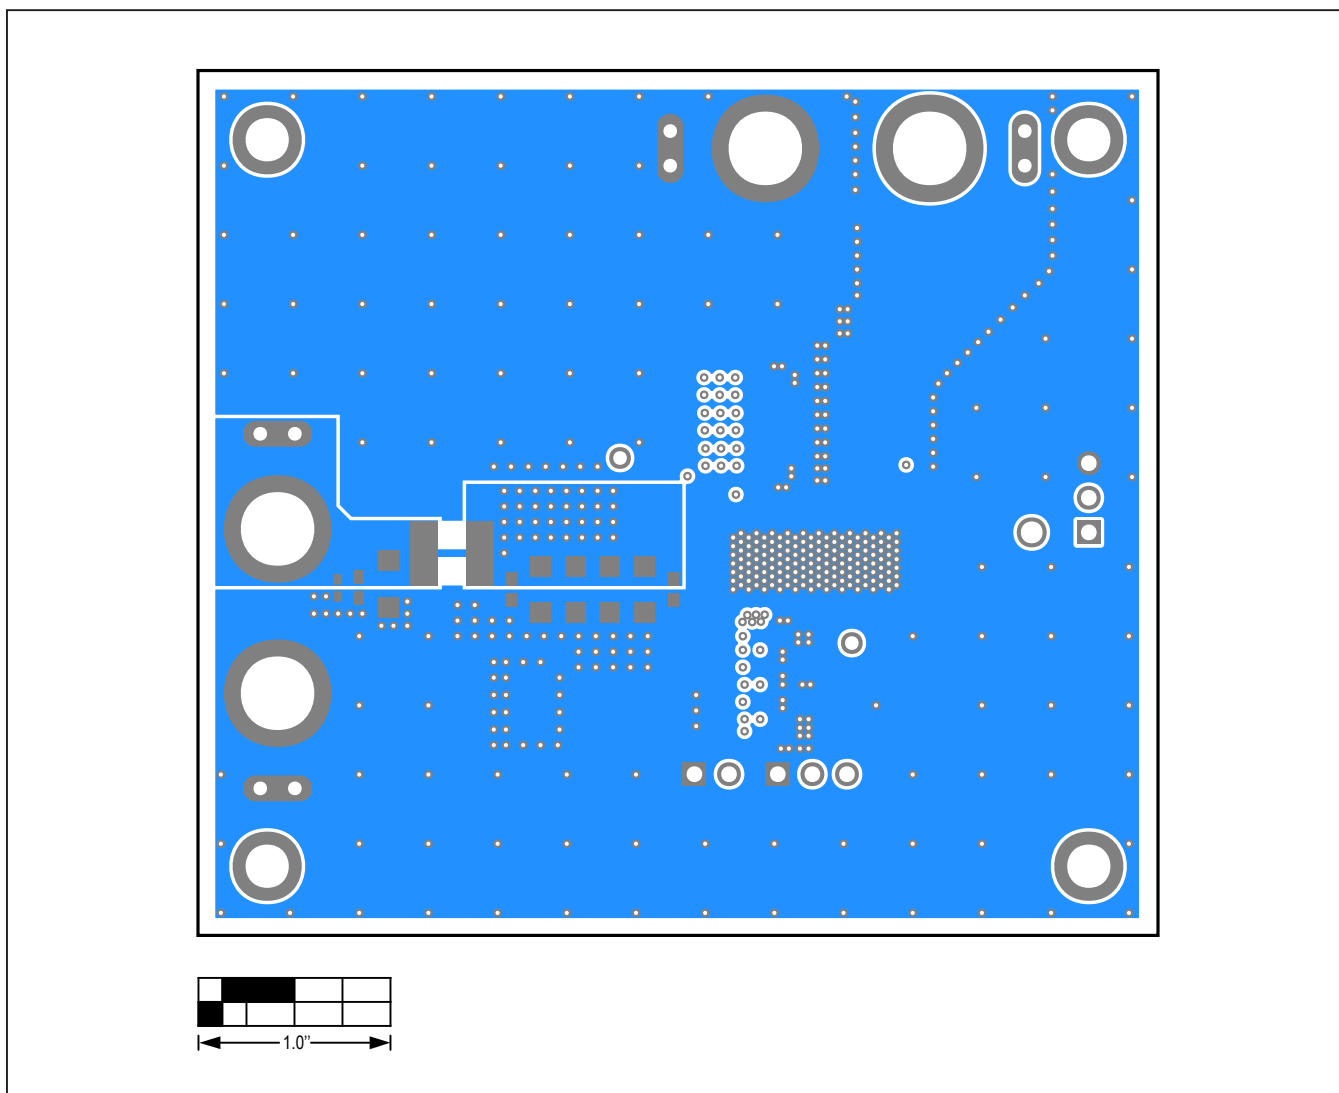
MAXM17546EVKITBE# 5V Output EV kit PCB Layout—Bottom Layer
